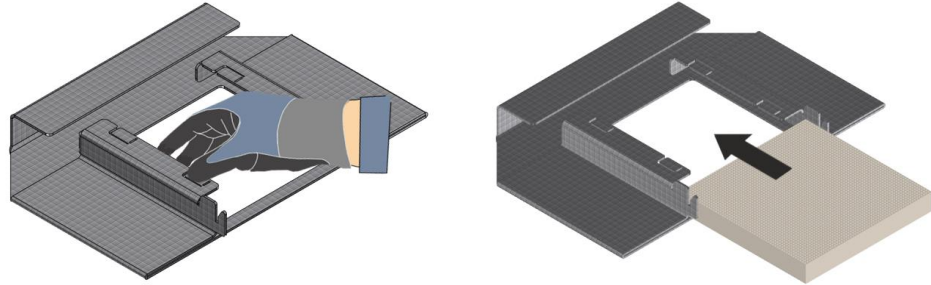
Inserting the ceramic honeycombed support (similar to picture)
